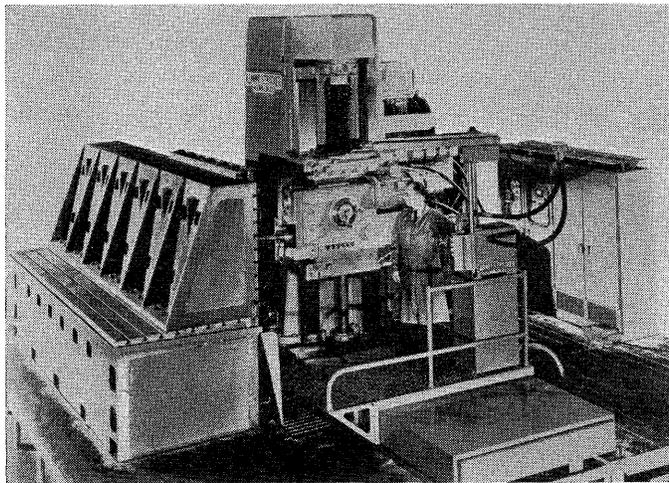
Application of control equipment to a large three-axis contour milling machine.
